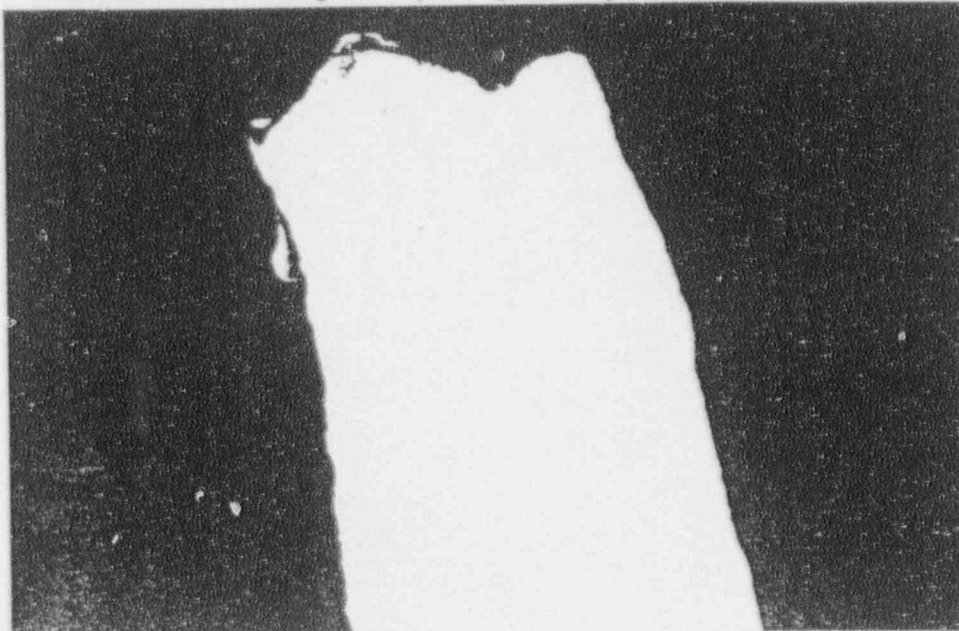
Cross-section through bellows, near center of crack. No parallel cracking visible near main fracture (top); minor 2° crack is mechanical damage. (500X) Mi-2637.
